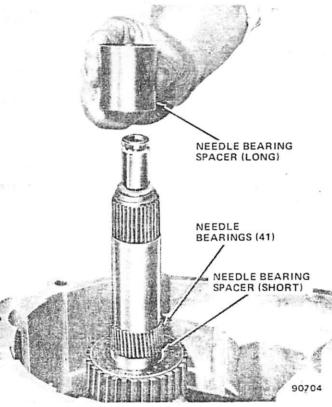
D-65 Mainshaft Needle Bearings and Spacer Installation
